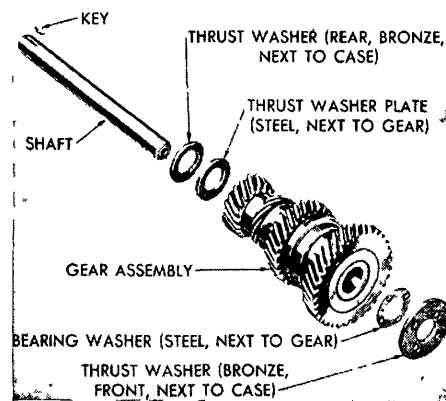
Countershaft gear assembly and thrust washers. 1946-52 automatic transmission
